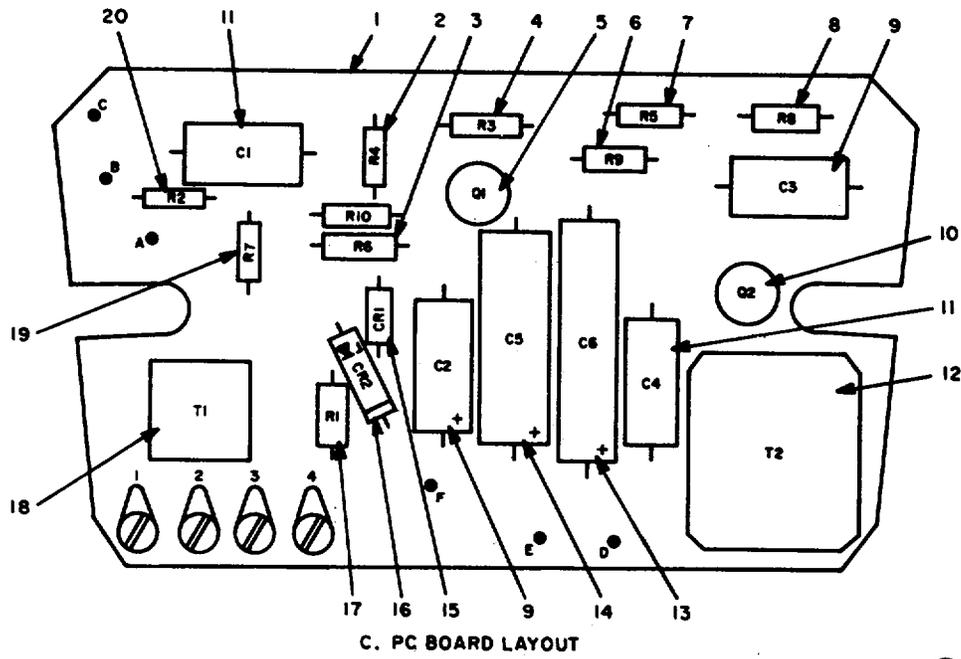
Call director, dial assembly and speaker assembly, parts location.
